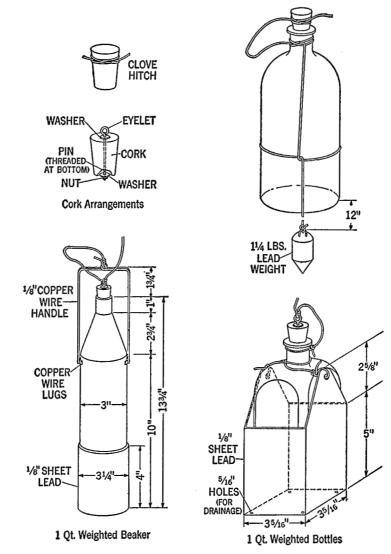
CONTAINER ASSEMBLIES FOR BOTTLE OR BEAKER SAMPLING
